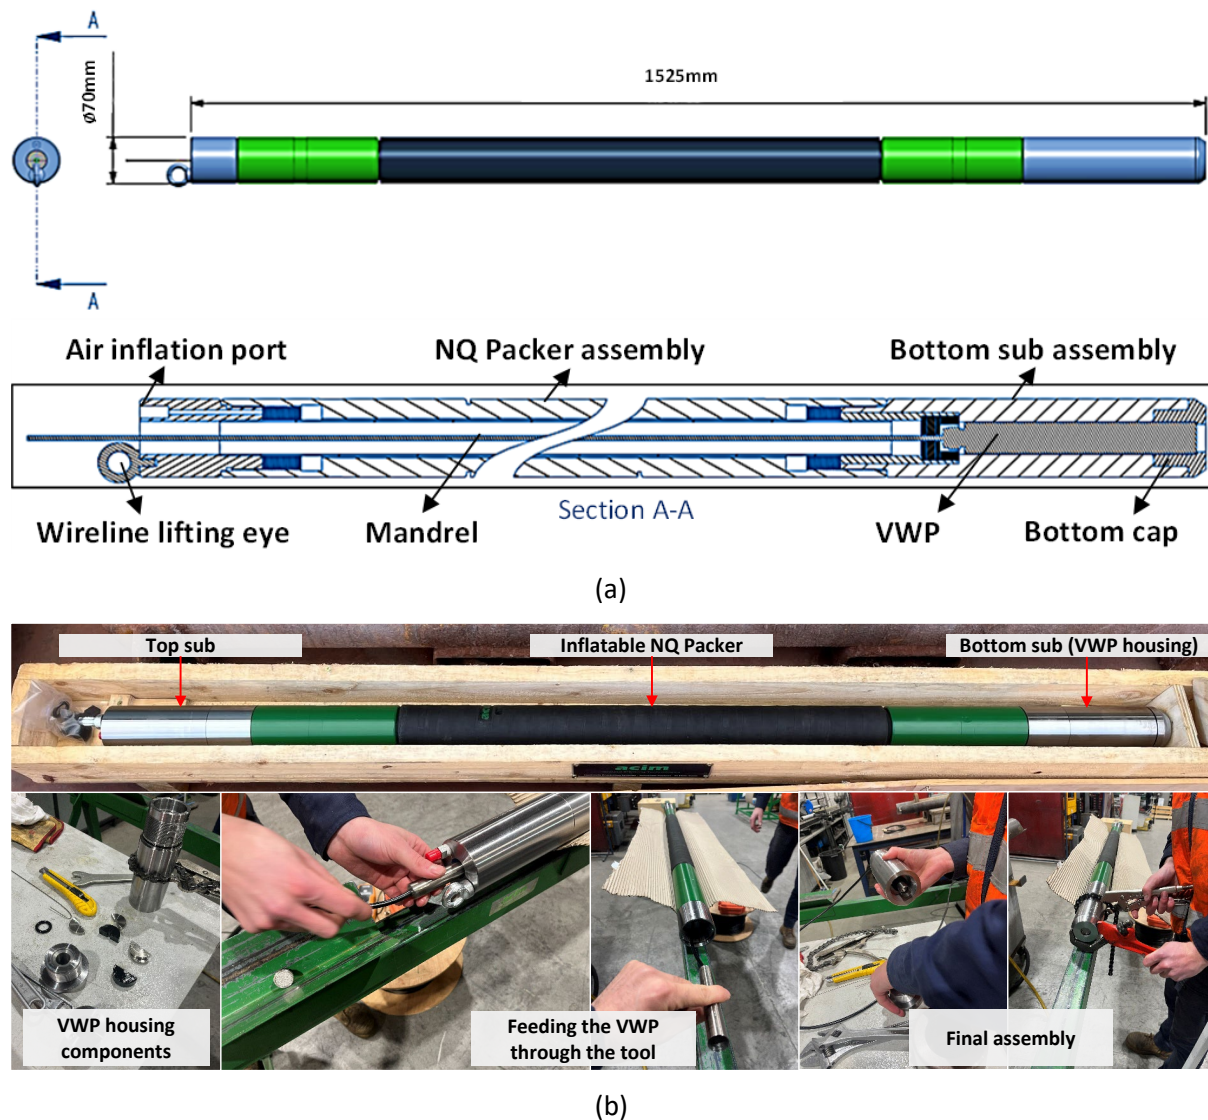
Hybrid vibrating wire piezometer–packer system developed for the Carrapateena trial: (a) Schematic and section view of the system configuration; (b) Assembled tool and key assembly stages
